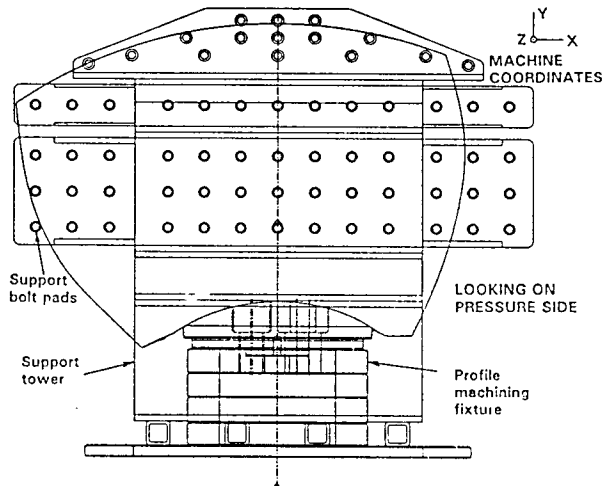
PROFILE MACHINING SET-UP (front view)
